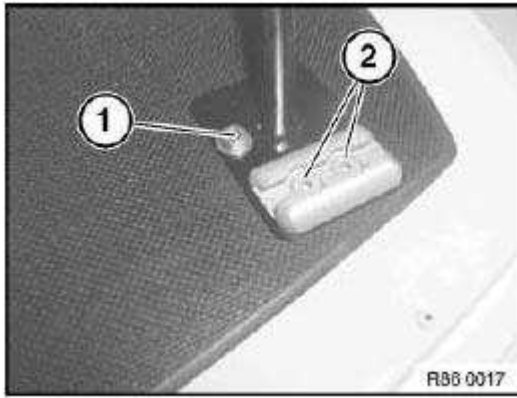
Identifying Hexagon Screws & Countersunk Head Screws
